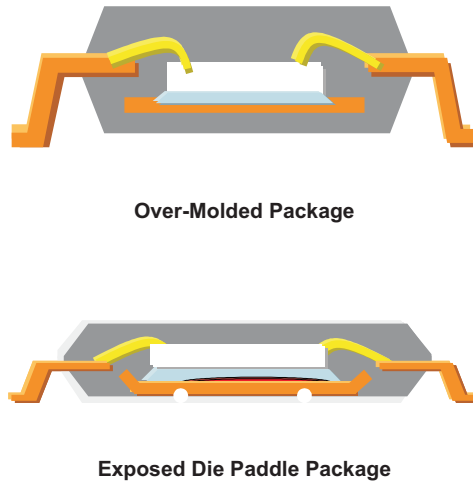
Construction Differences Between an Over-Molded and SMT Package With Exposed Die Paddle
